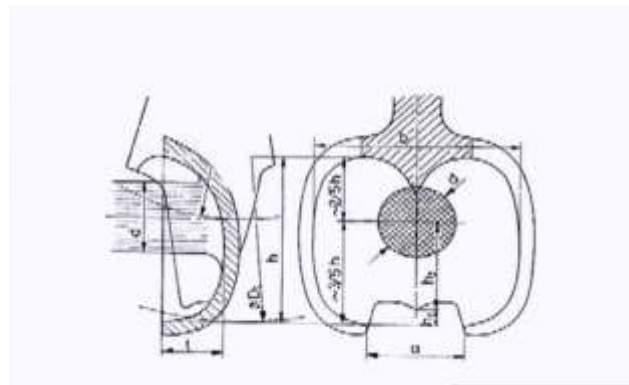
Cut-section of Pelton turbine blade in front and side views
